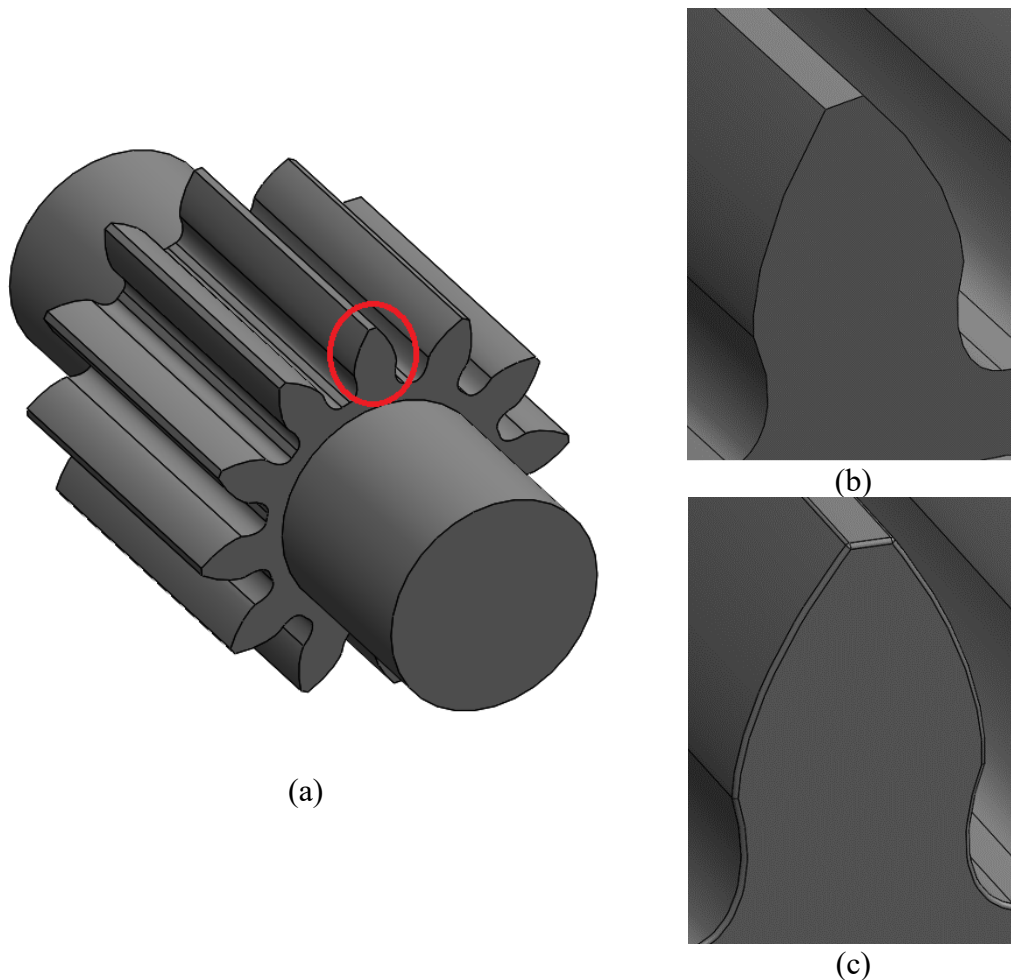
(a) Gear wheel of a group 2 pump. (b) Sharped edge tooth, NoSp. (c) Smoothed edge tooth, STD.
